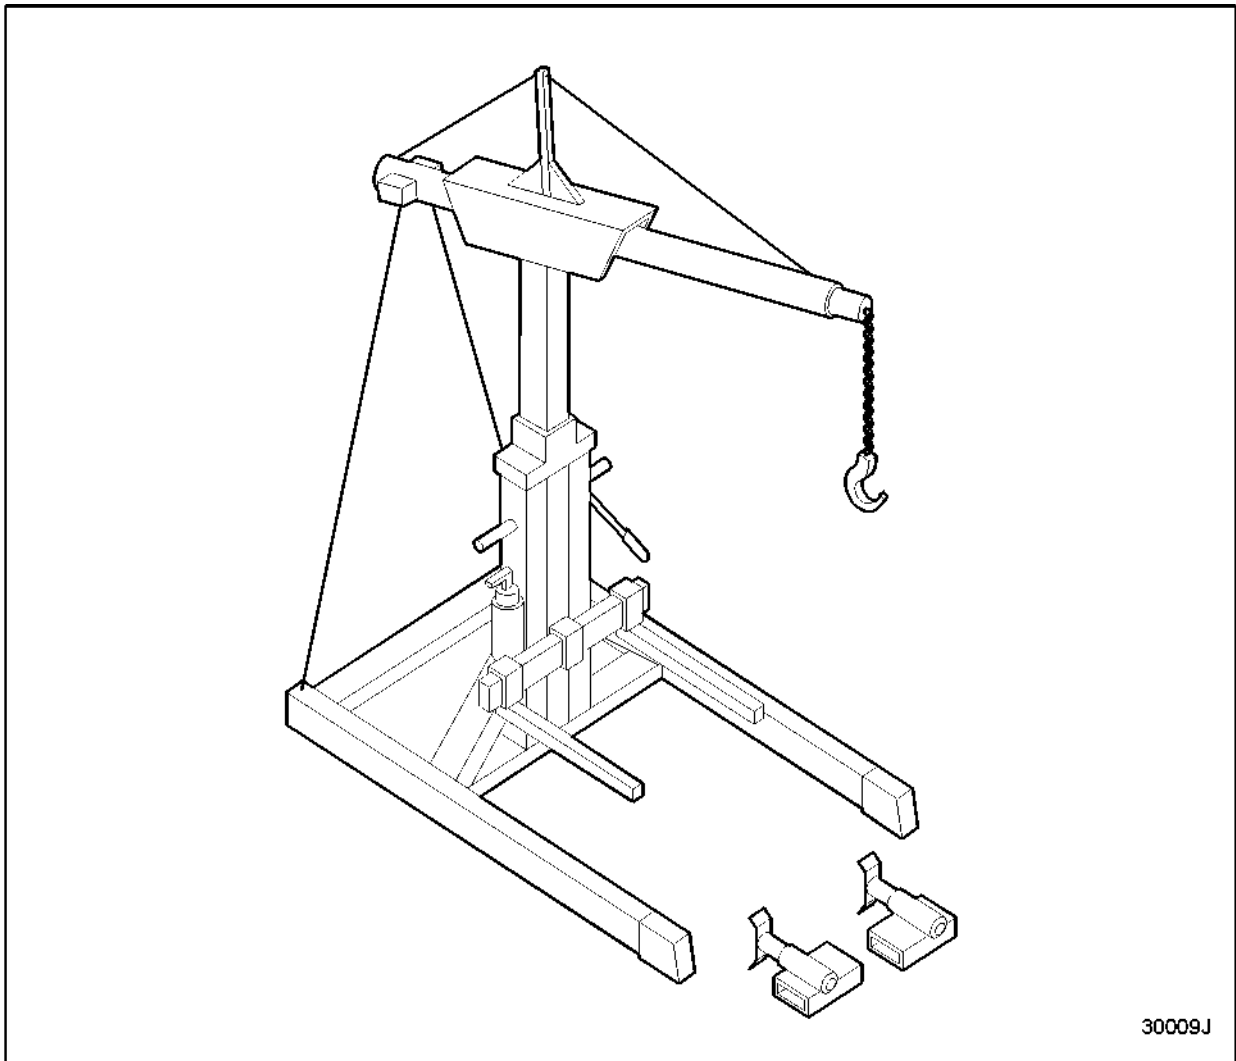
Jib Crane (4000 LB Max Lifting Cap,J 33050-A
